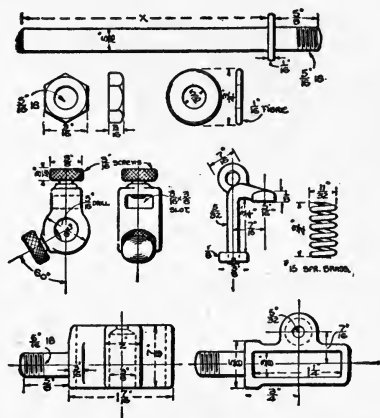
DETAILS OF BRUSH-HOLDERS.
